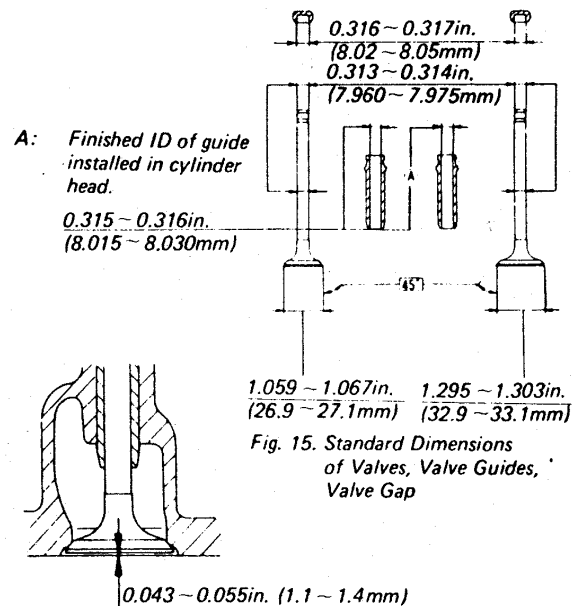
Standard Dimensions of Valves, Valve Guides, Valve Gap
